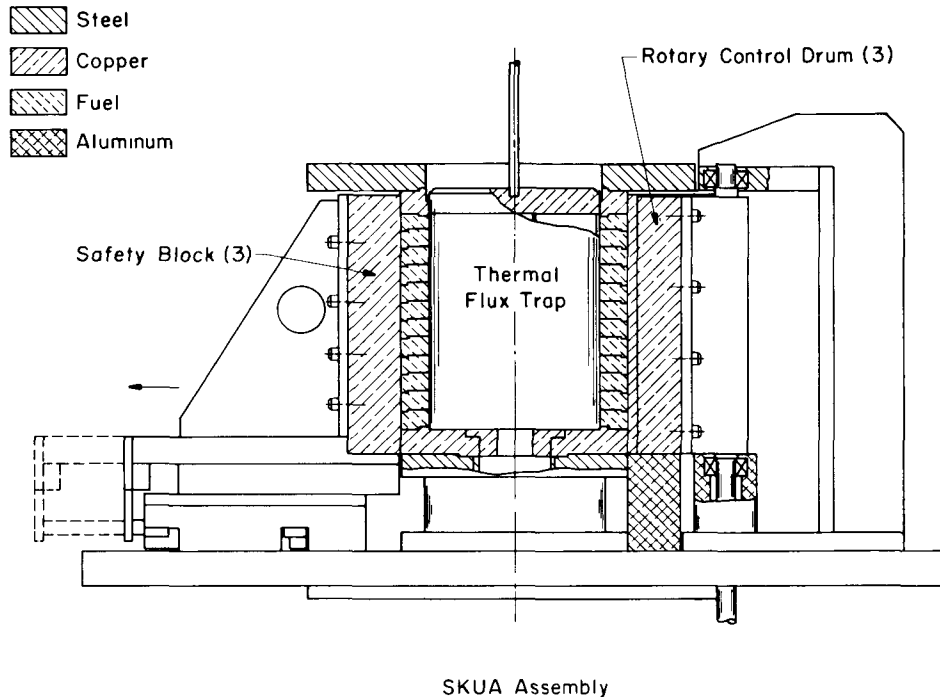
Cross sectional schematic view of the SKUA assembly.
